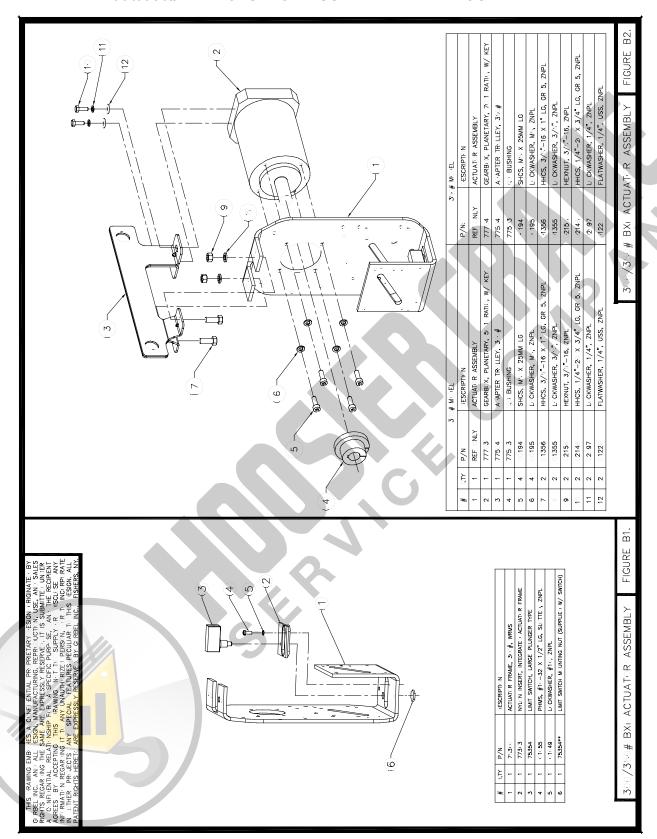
(bottom) & Figure B2 (top). 300/380# BXi Actuator Assembly.
